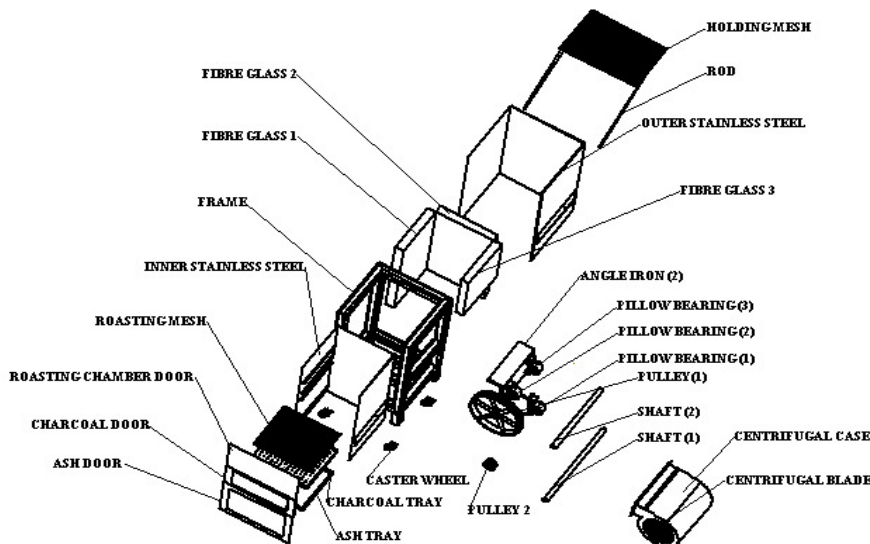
(a): Orthographic view of the improved road-side maize roasting machine
